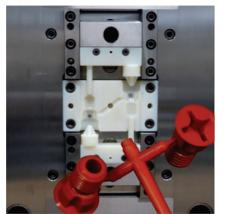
PolyJet mould inserts embedded into steel mould block [19]
